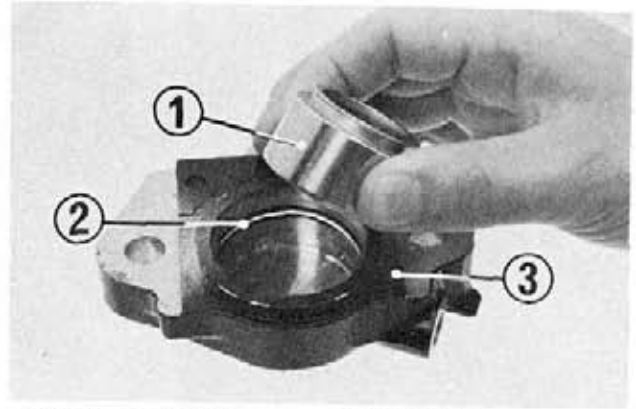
① Piston ② Piston seal ③ Caliper B
